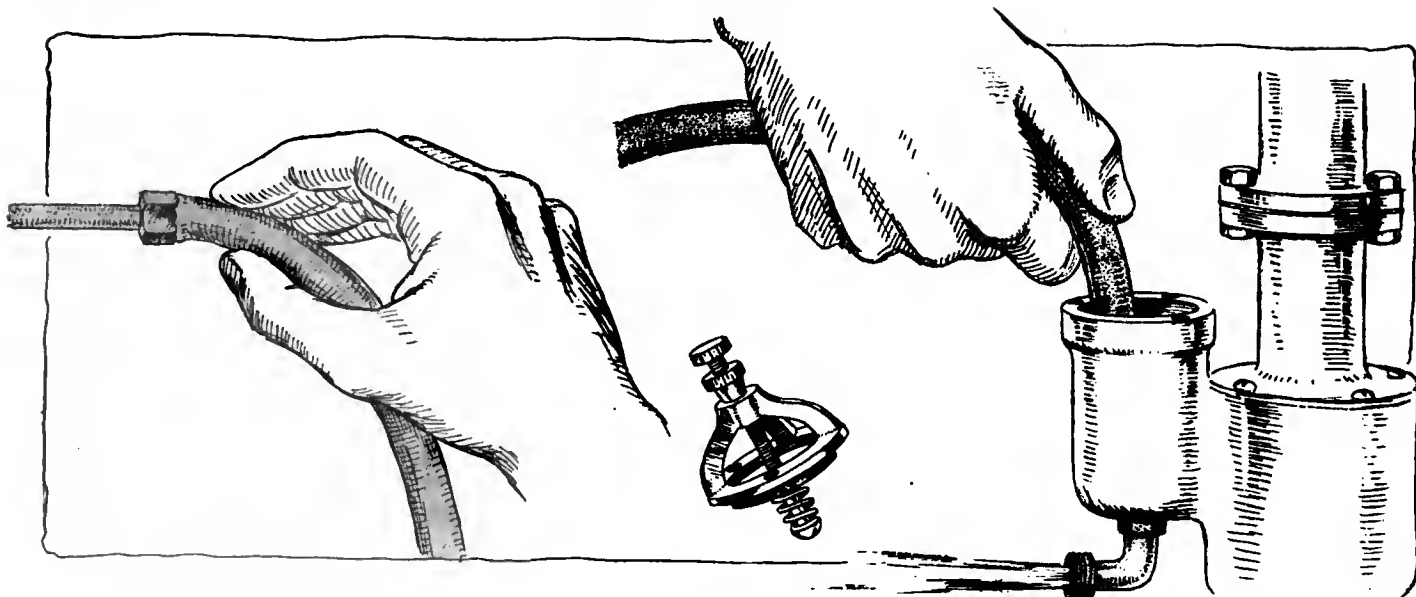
Cleaning a carbureter with an air blast. Left, compressed air tube with a piece of copper tubing in the end for a nozzle; center, auxiliary air valve cage; right, blowing out the carbureter
